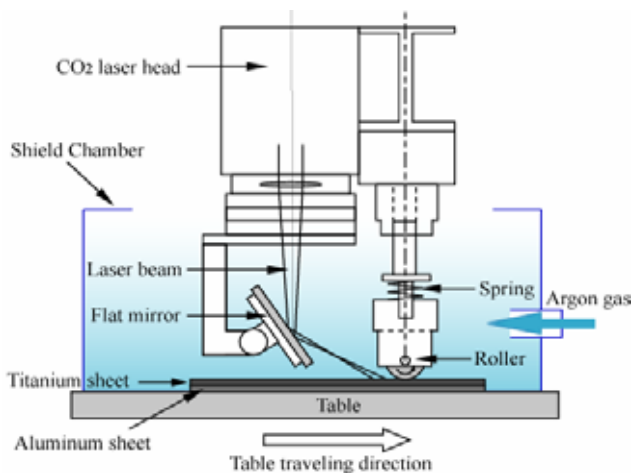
Schematic drawing of device for Laser roll welding condition of H4600/A5052
